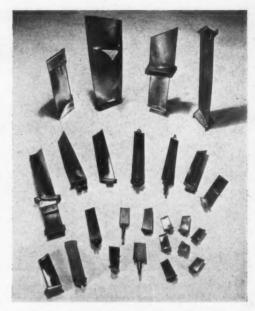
Some typical blades on which the root forms are machined by continuous broaching
